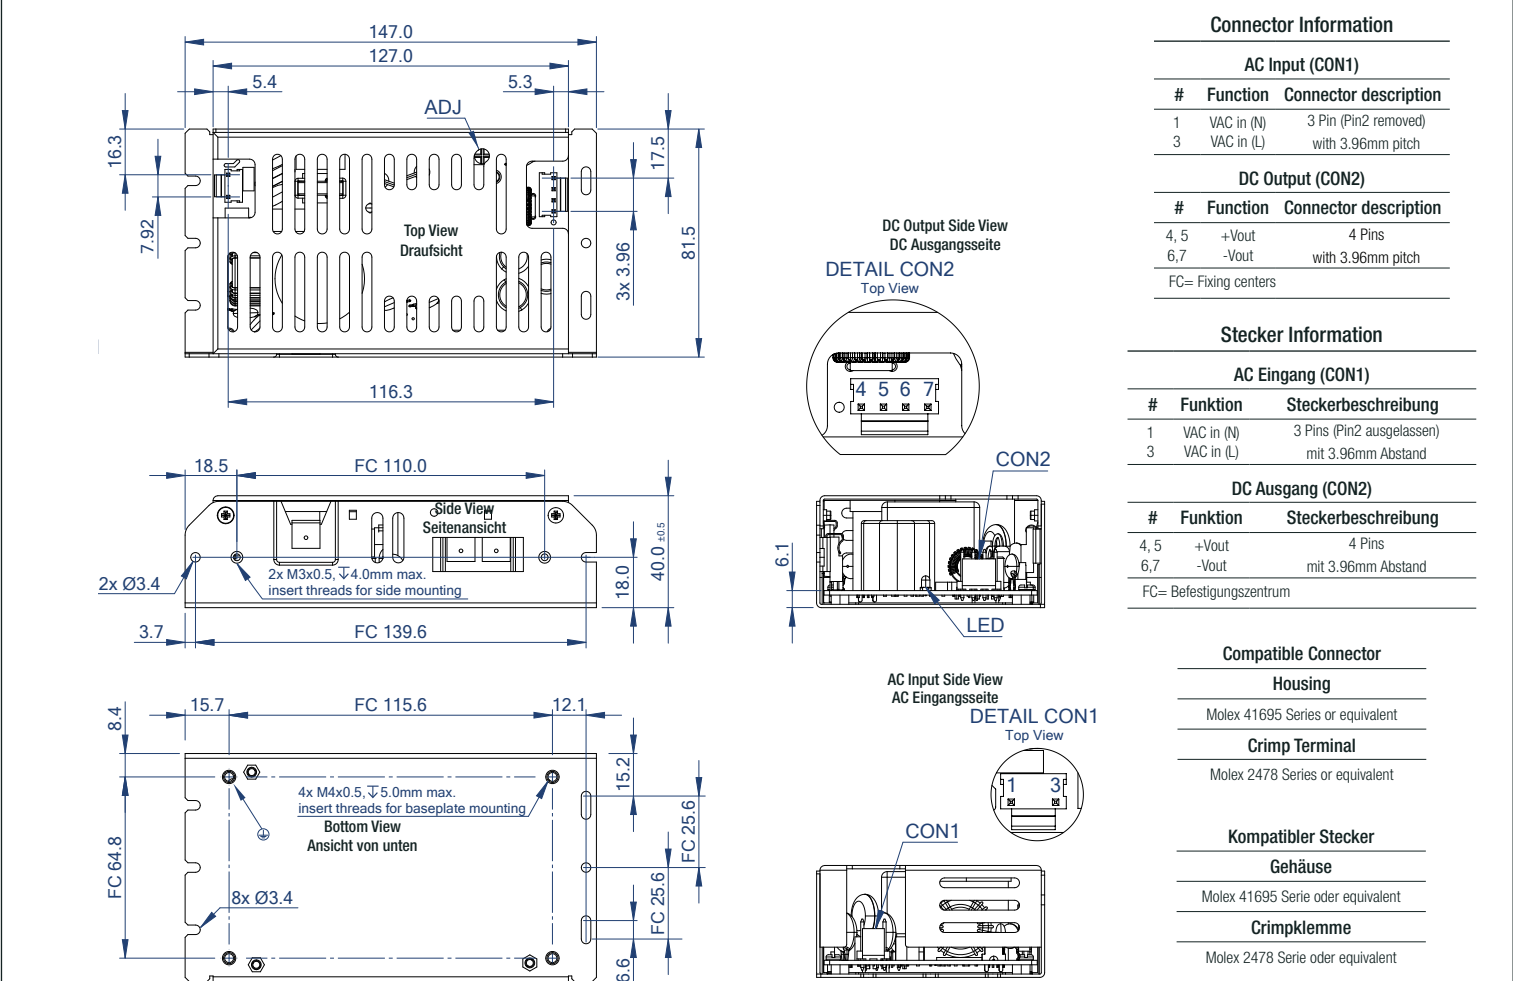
Mechanical Dimension (mm) / Mechanische Dimensionen (mm)
